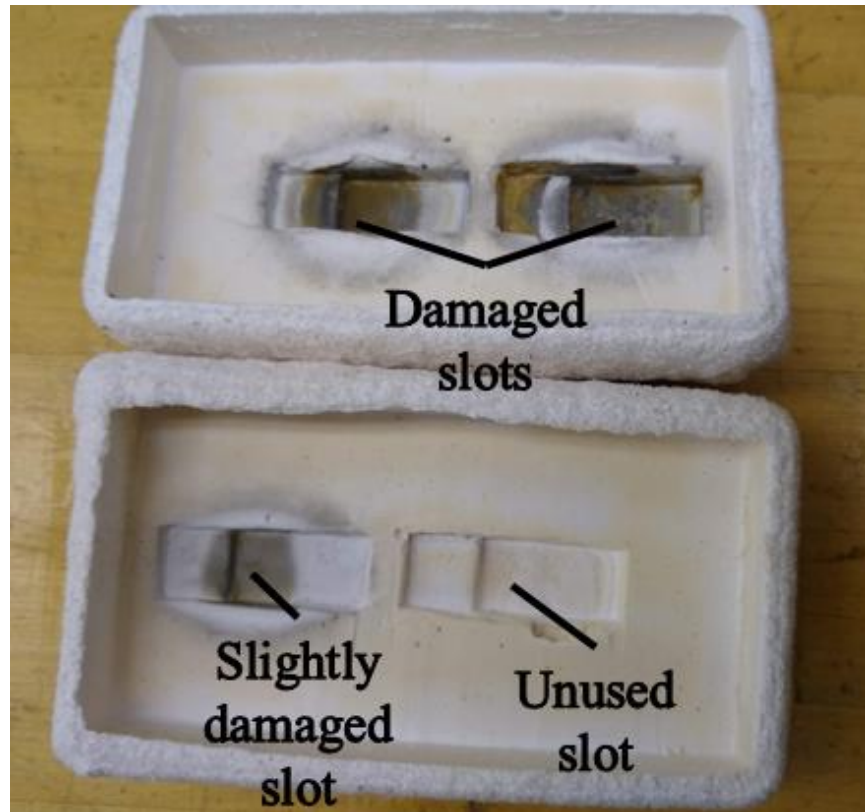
Silica shells used to hold RB-SiC coupons and filler metal during joining
